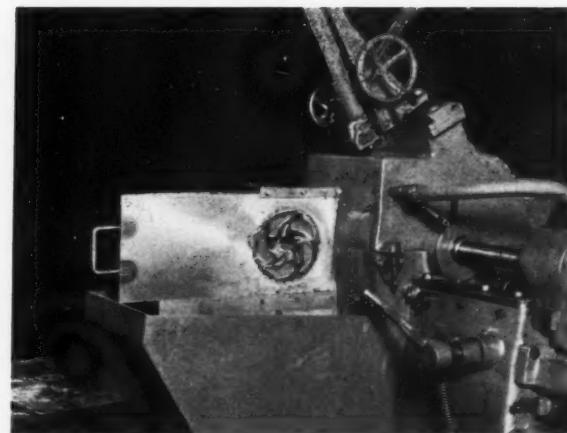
By eliminating sprocket hubs, single pass grinding between double disks became possible
